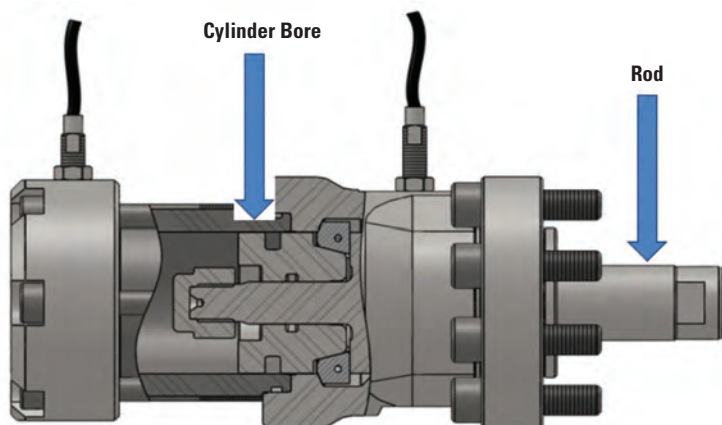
Slide Movement example using the Hydraulic Locking Core Pull Cylinder.
